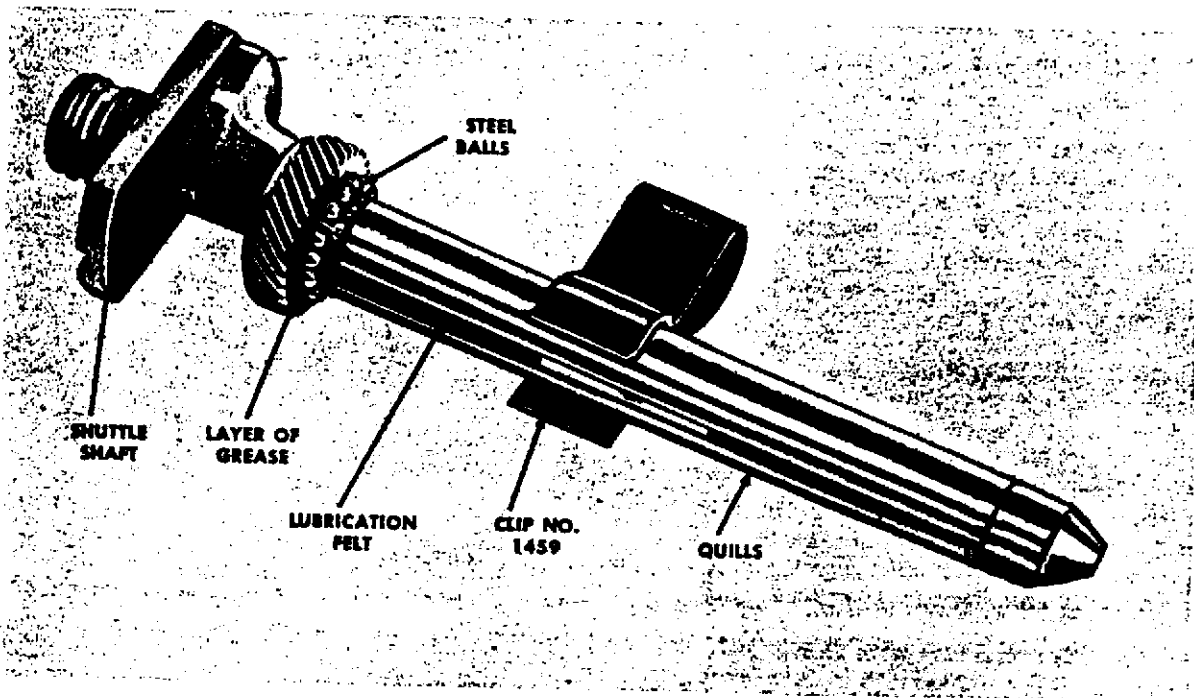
, Reassembly of Counter Gear and Shuttle Shafts
